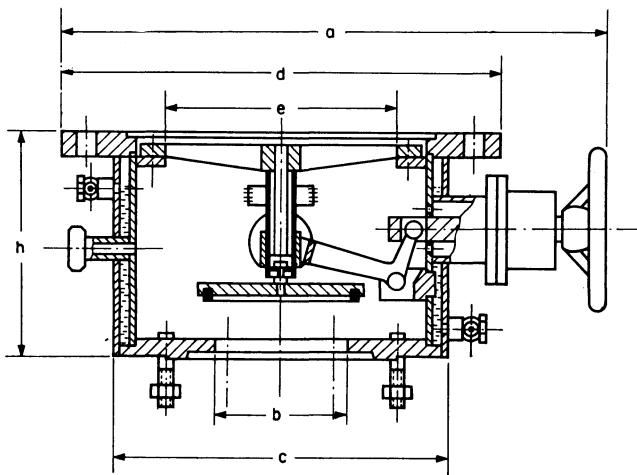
Dimensions of the screw and lever operated plate valves supplied by Leybold⁷⁶² (Table 6.13)
